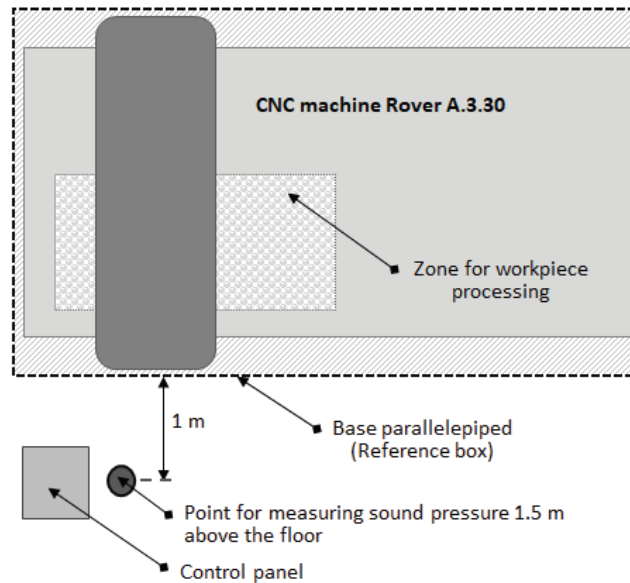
Diagram showing measuring point position and zone for workpiece processing
